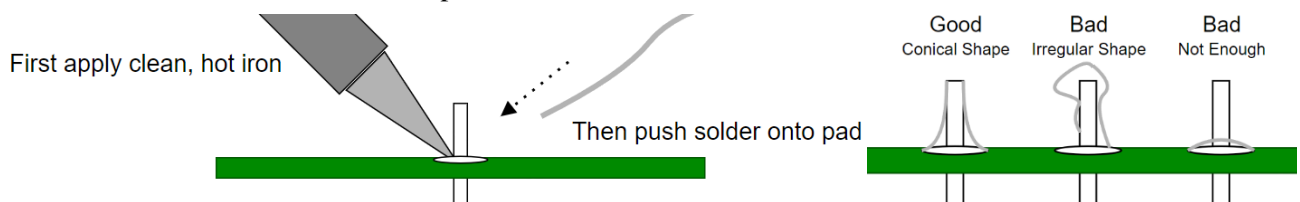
Basic steps of soldering through-hole components & quality of solder joints.
